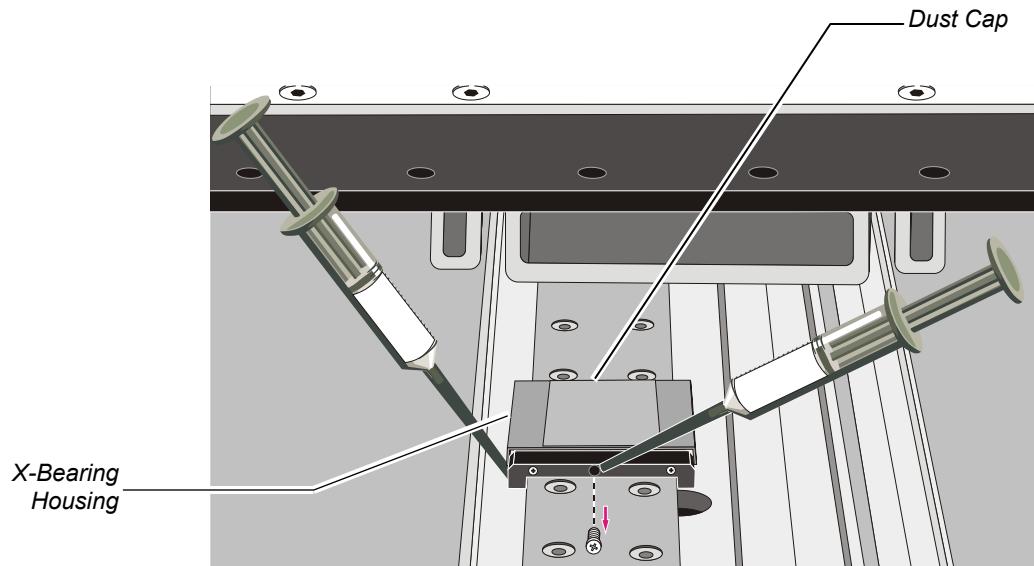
Lubricating the X-, Y-, and Z-Axis Linear Guides
